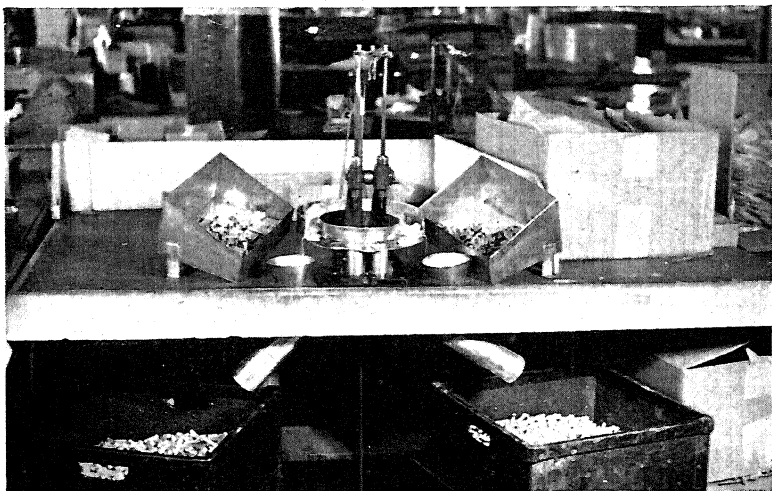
Workplace layout designed for drop delivery with funnels guiding parts through small openings in bench.
